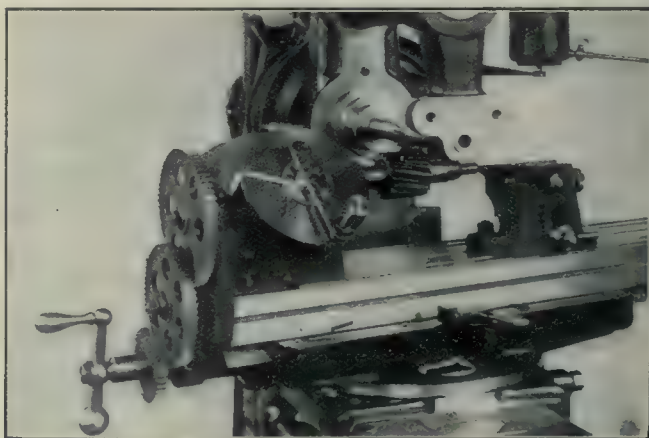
Head Arranged for Cutting Ordinary Spiral.
